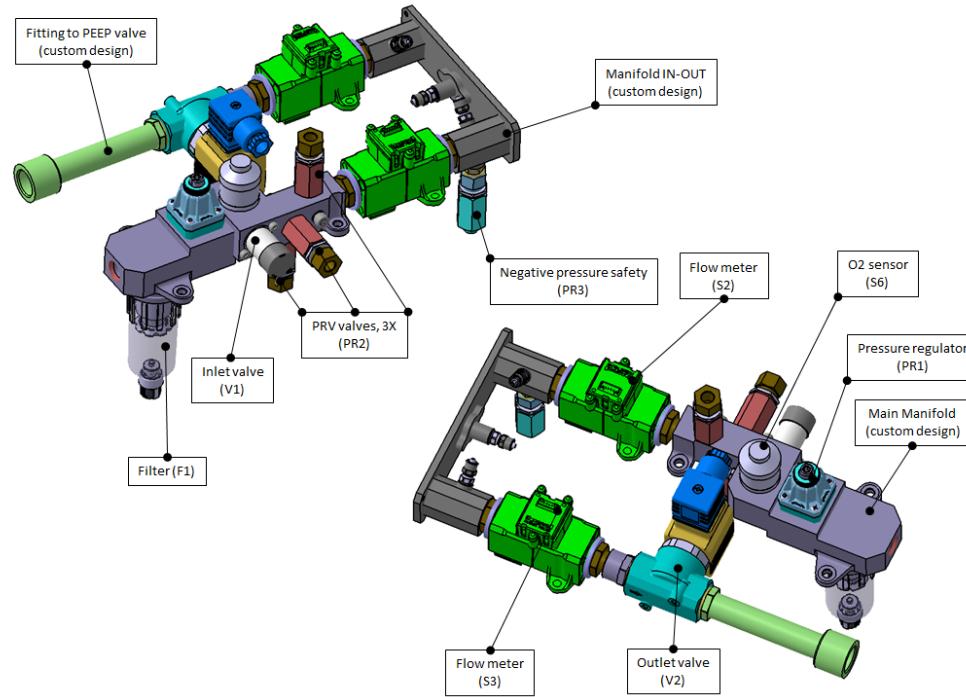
Internal 3D view of the FI5 pneumatic system with detail on valves and sensors.
